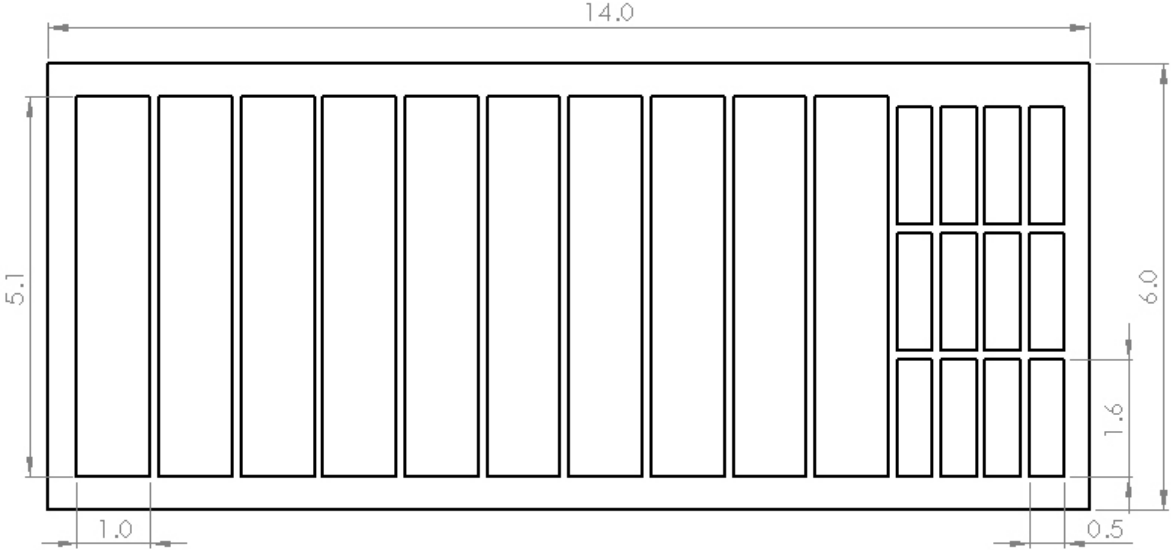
Four point bend and short beam shear specimens were cut from the same laminate.
